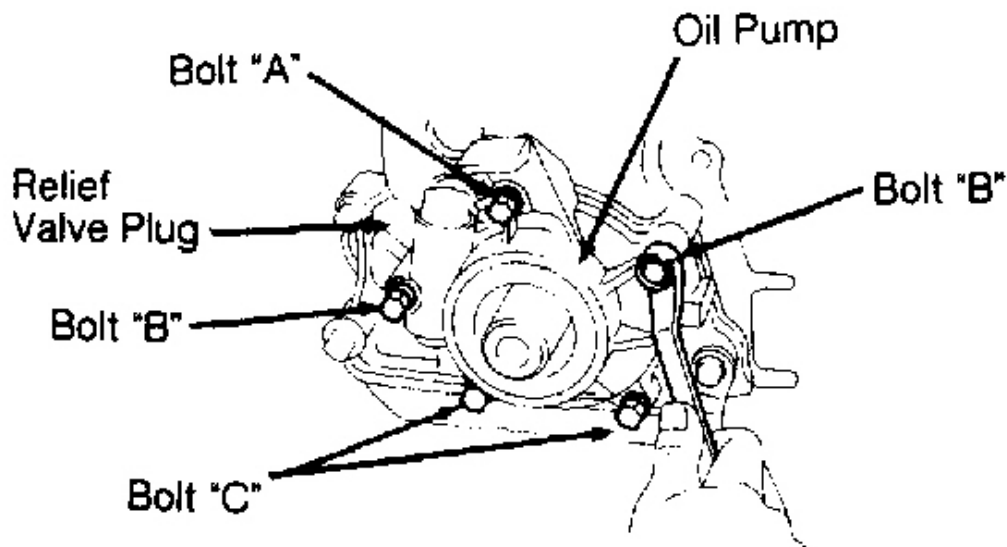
Identifying Oil Pump Relief Valve Plug & Bolts
